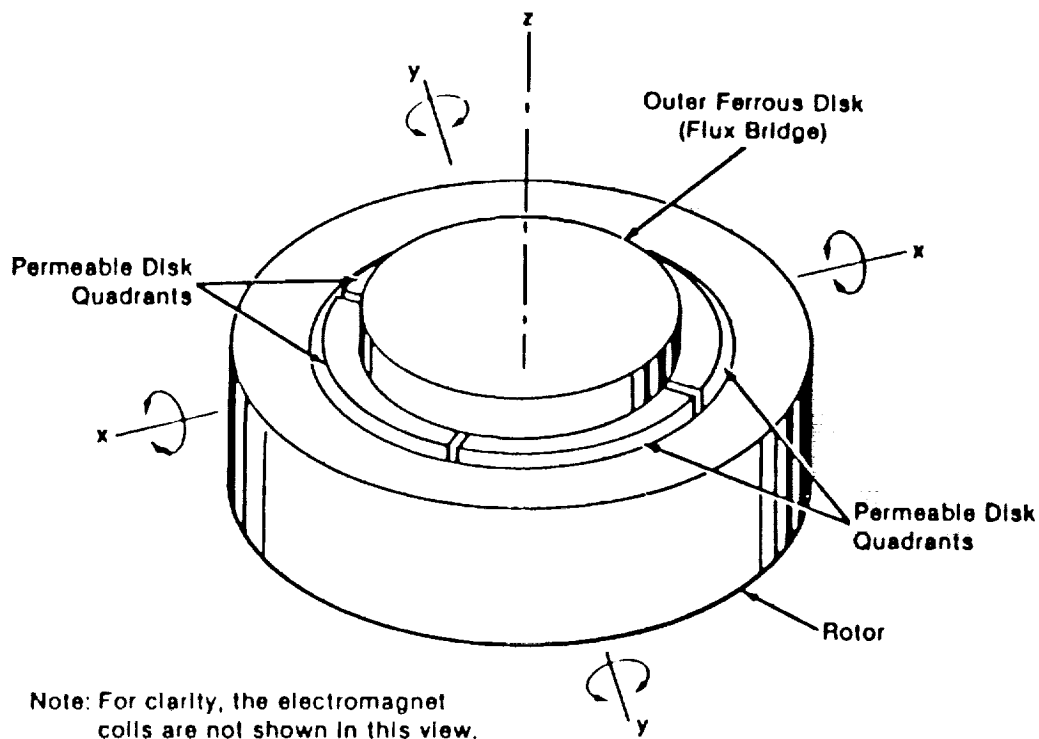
Off-Axes Torque Control Magnetic Bearing
